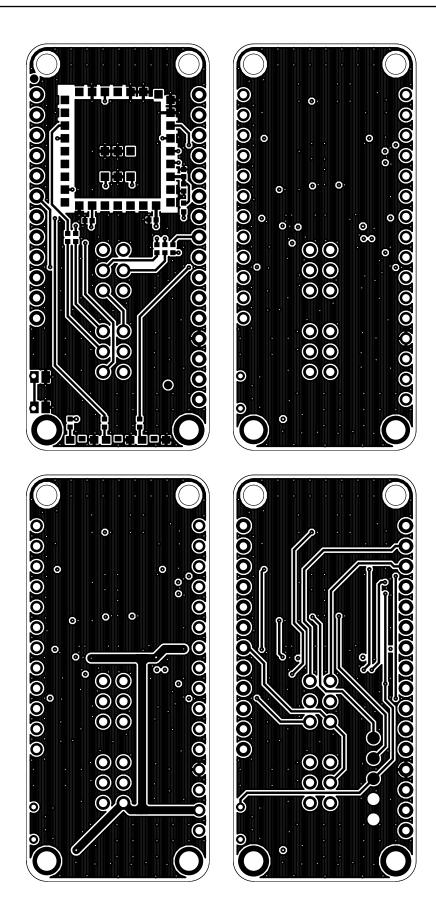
Top layer (upper left), second layer (upper right), third layer (bottom left), fourth layer (bottom right)
